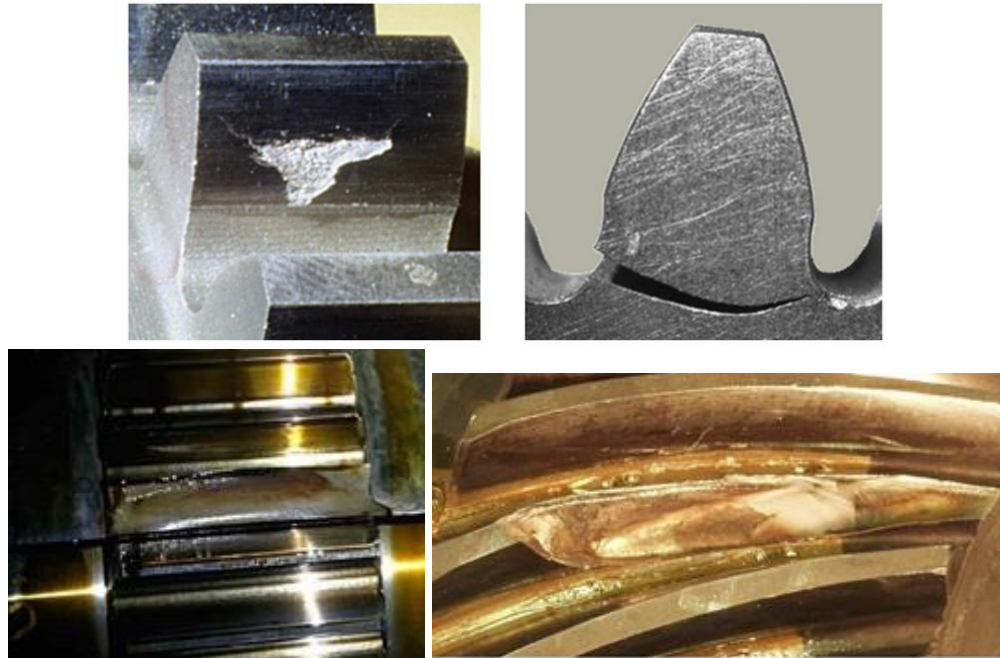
Different type of tooth breakage reproduced from (Dipl.-Ing. I. Boiadjiev 2015).
